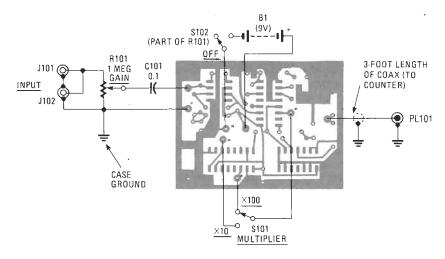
CONNECTIONS TO CASE-MOUNTED parts. Shield of coax used for output is tack-soldered to ground foil on bottom of board.
